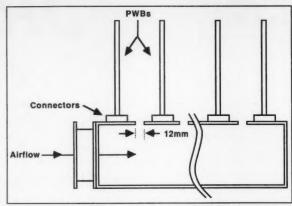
Holes in an otherwise closed chassis were used by one computer manufacturer to direct air over PWB surface.
